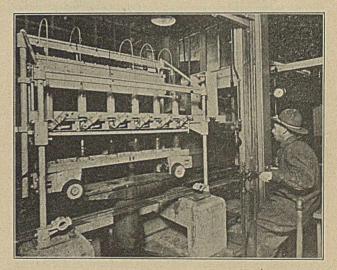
Shell-Filling Machine Filling 75 mm. Shell with Mustard Gas
